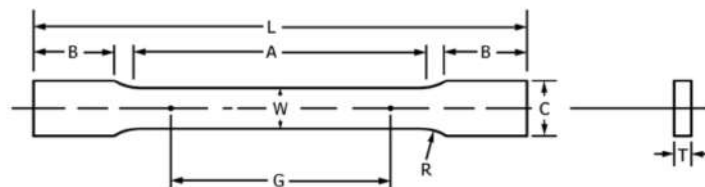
Specimen parameters for the tensile test (adapted from [58])
